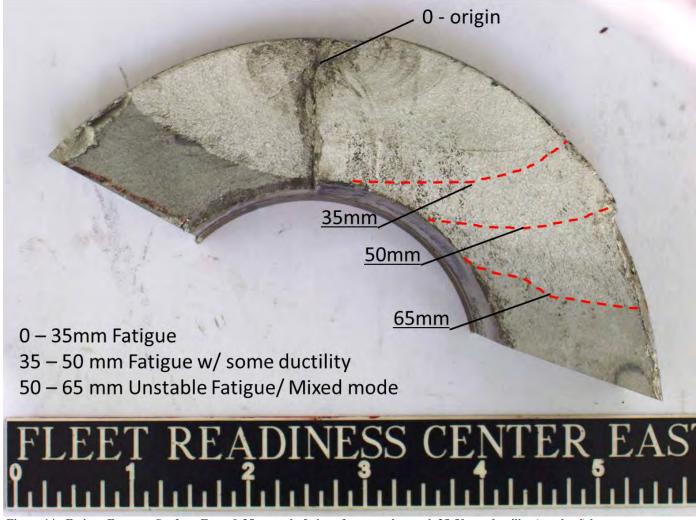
Fatigue Fracture Surface. From 0-35mm only fatigue fracture observed. 35-50mm ductility (overload) began to present. 50-65mm was mixed mode fracture with some fatigue within overload fracture.
